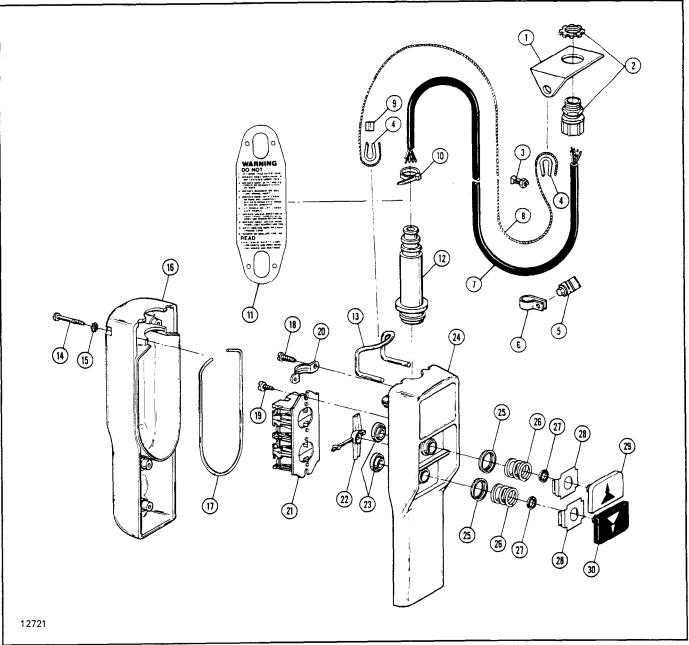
Push Button Station and Conductor Cable Assembly. Two Speed Hoists Only.
